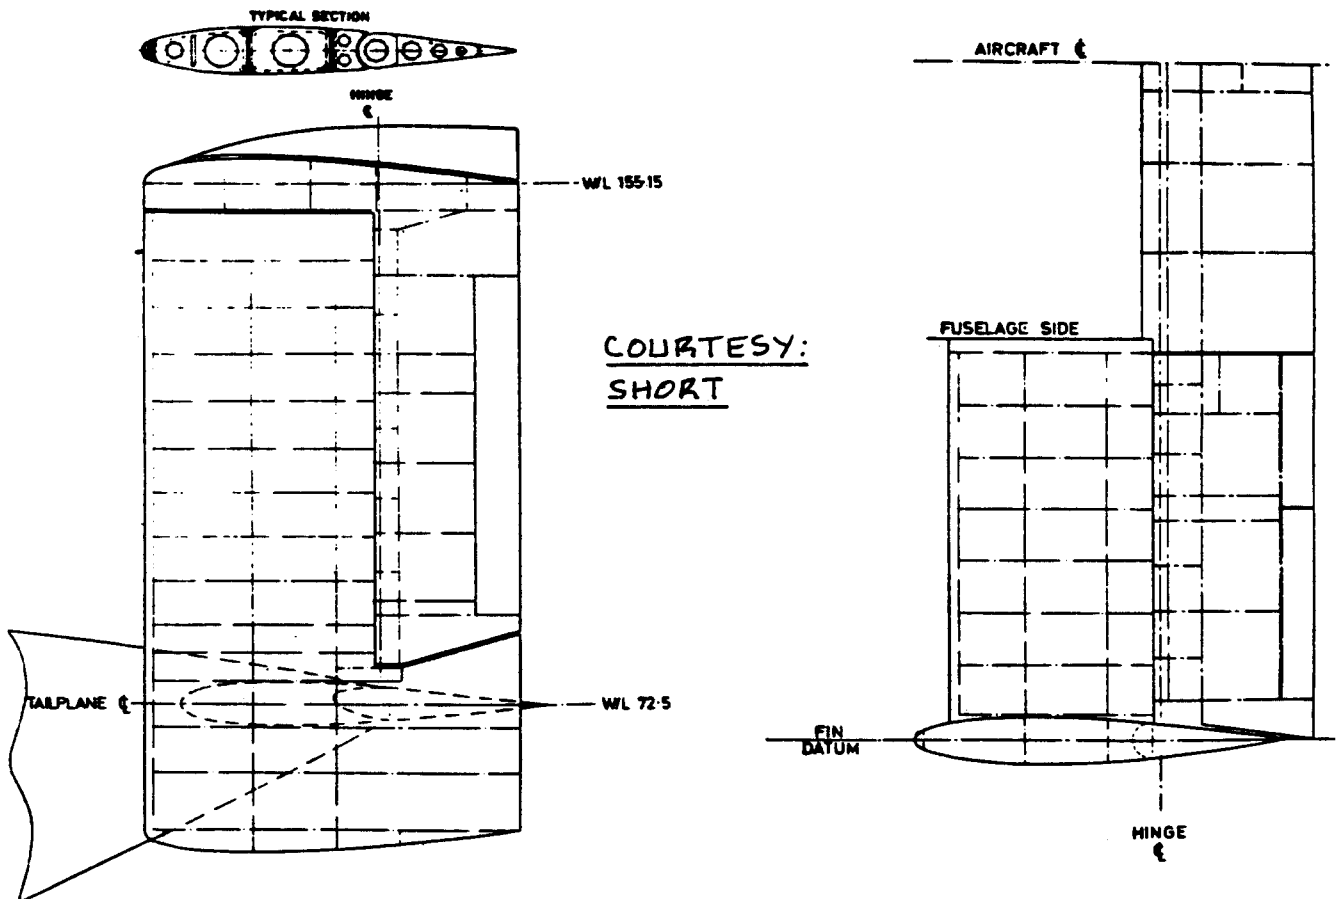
Empennage Structural Arrangement Short Skyvan
